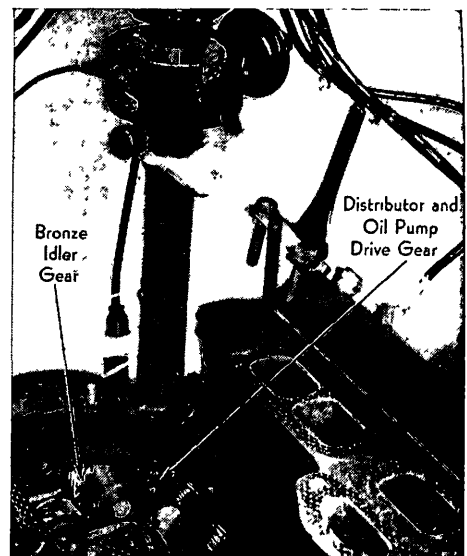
Distributor and oil pump drive, 1936-48 V8
